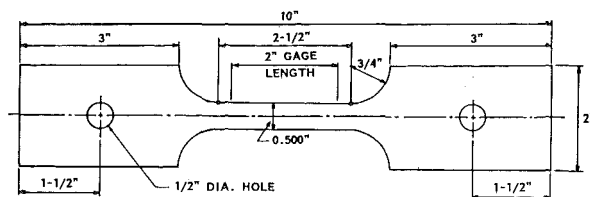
Nominal Dimensions of Tensile Coupons Used for 100XF, 50XF, and 35XF Sheet Steels
